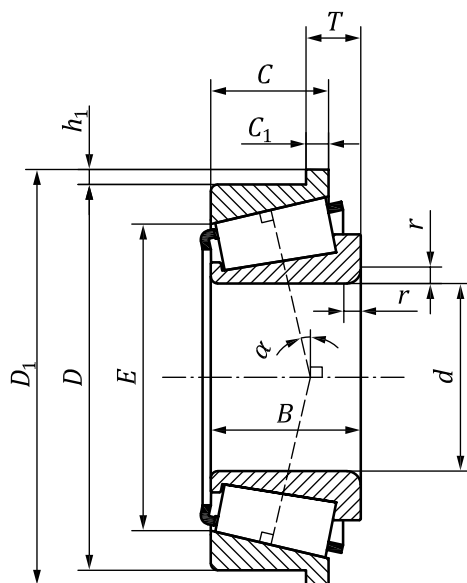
Single-row tapered roller bearing with flanged outer ring
